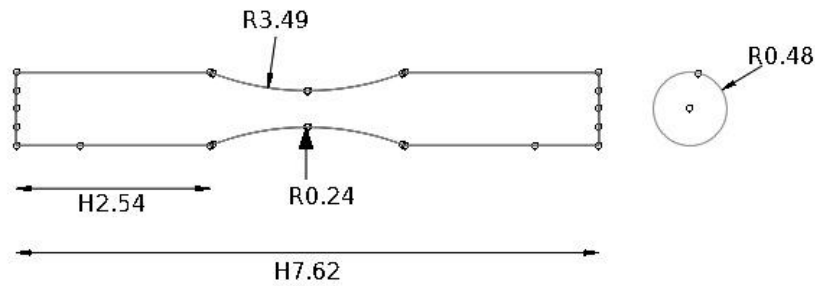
Fatigue Specimen for the R.R. Moore Rotating Beam Apparatus (Dimensions in cm)
